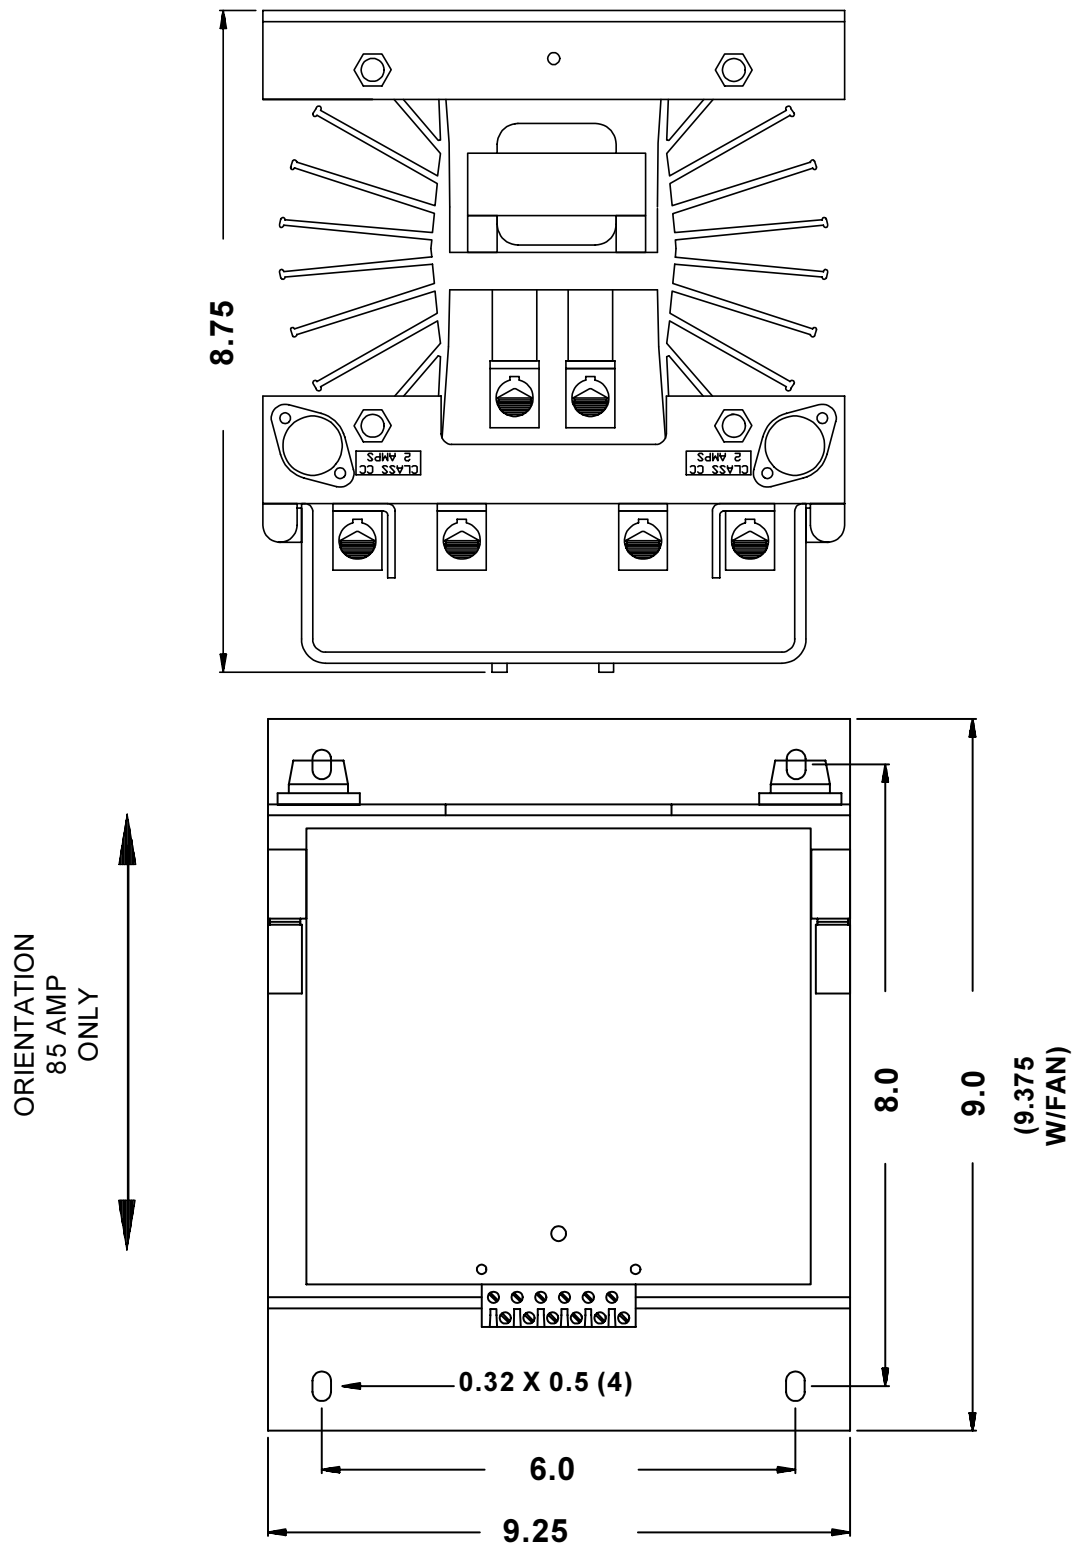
Mounting dimensions, Model 3027M, 85, 145 & 175 Amps
